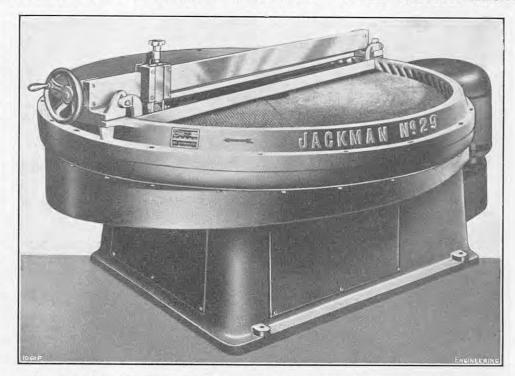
72-in. Horizontal Disc Grinder; Geo. Jackman Machine Tool Co., Ltd.
